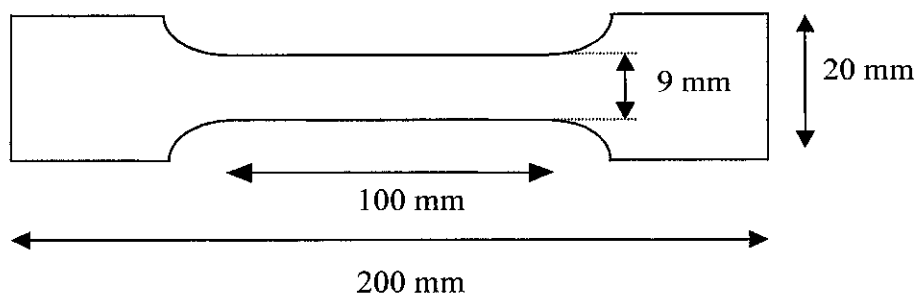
The dumbbell-shaped specimen for tensile testing
